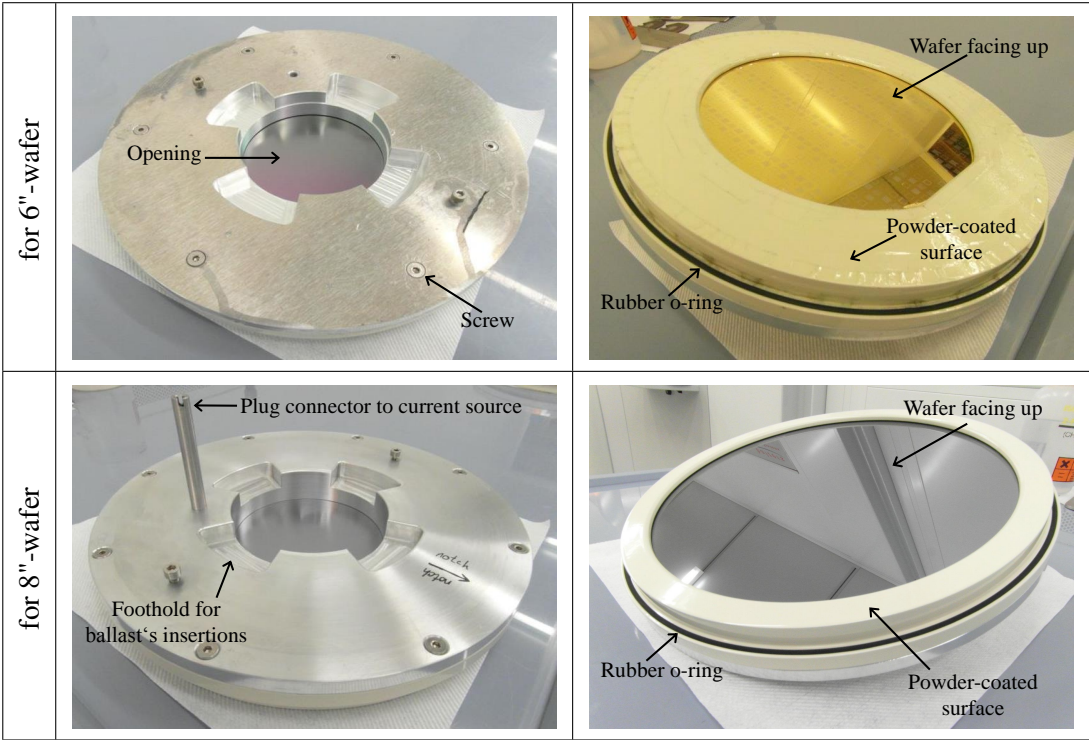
Metallic wafer holder for the electroplating on the 6"- and 8"-wafer.
